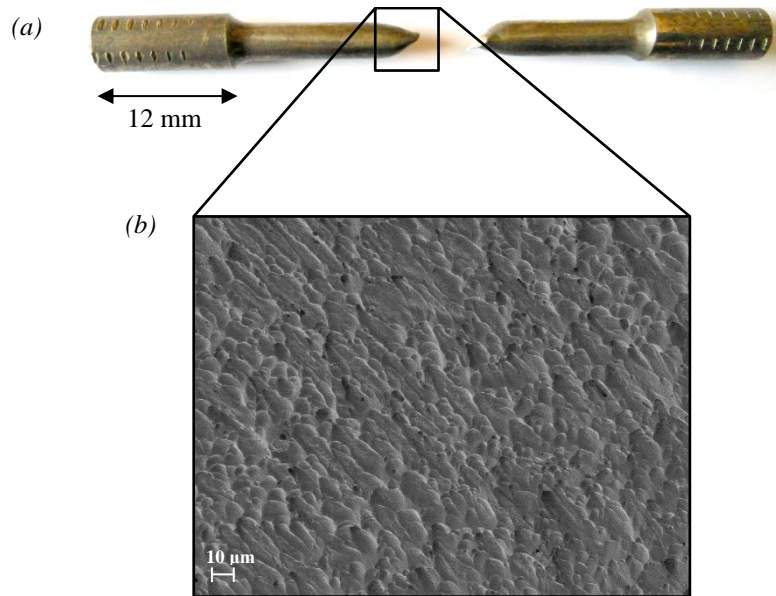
(a) Base material after uniaxial tensile test. (b) Fracture surface of the base material.
